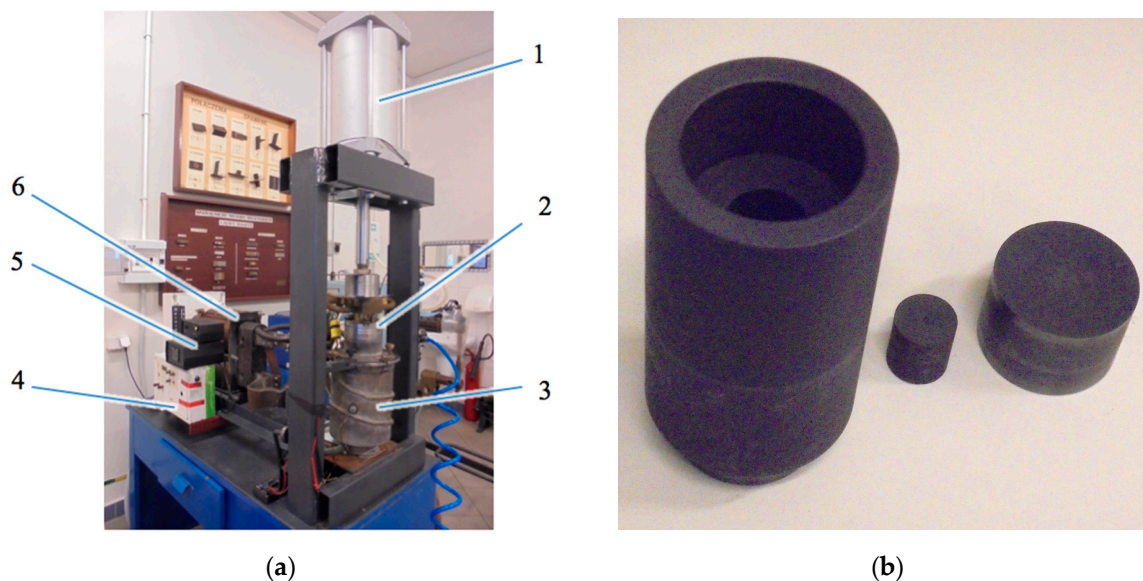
Electroconsolidation apparatus: (a) Overall view; (b) Disassembled graphite mold. 1—Pressing unit, 2—Built-in mold, 3—Vacuum chamber, 4—Electrical current filter, 5—Temperature control unit, 6—Current transformer.
